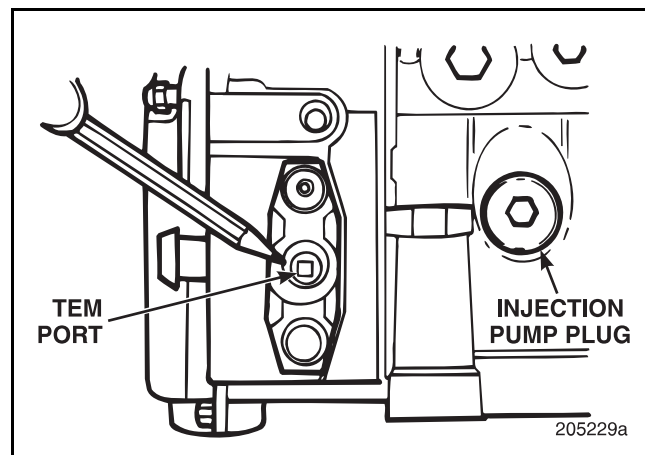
P7100 V-MAC Injection Pump/Governor Pre-Lubrication
